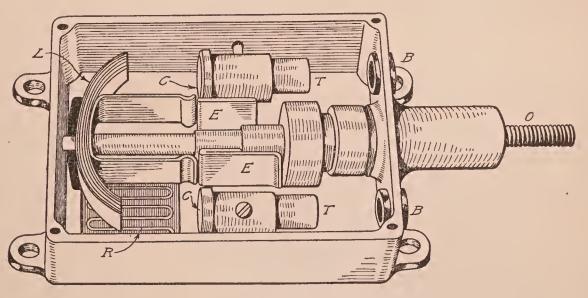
Gray and Davis Laminated Type of Starting Switch Courtesy of The Horseless Age
